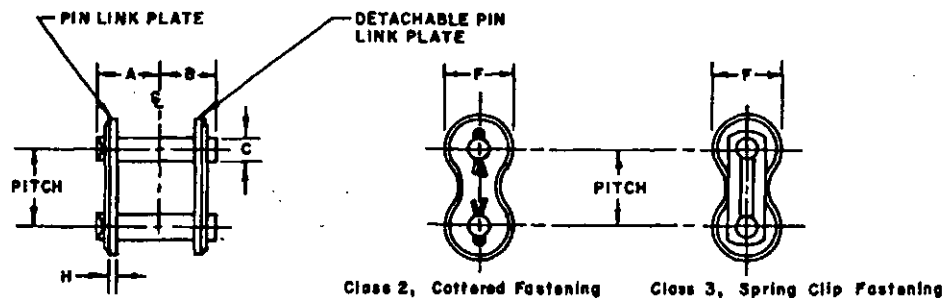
SINGLE STRAND LINK PLAN AND SIDE VIEWS
